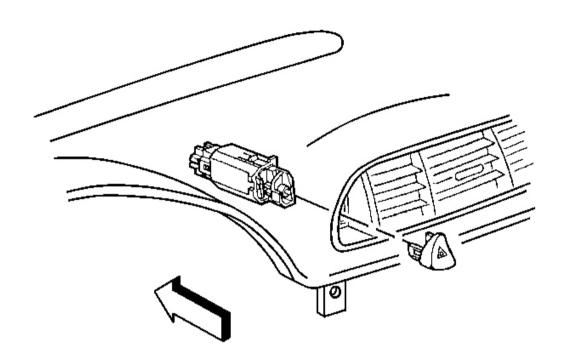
Hazard Warning Switch Button To IP Upper Trim Pad Courtesy of GENERAL MOTORS CORP.
